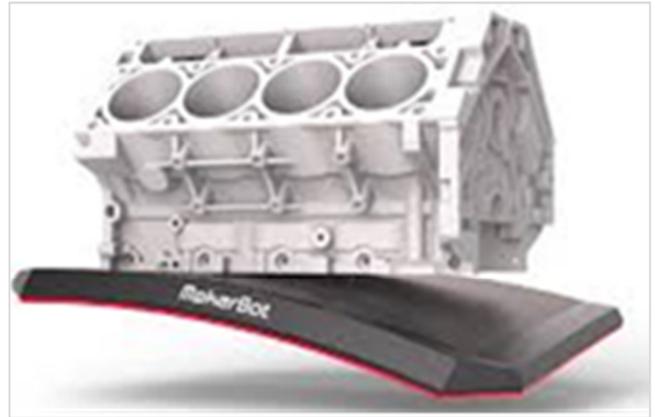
MakerBot print with bendable Flex Build Plate [16].
